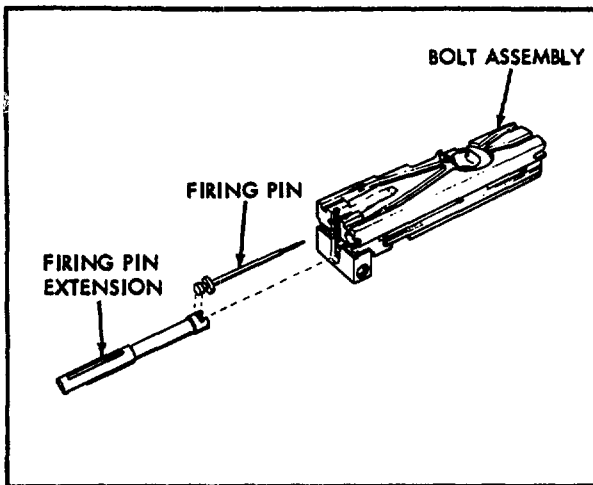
Disassembly/assembly - cal..50 machine gun, M2, HB (2 of 4)
